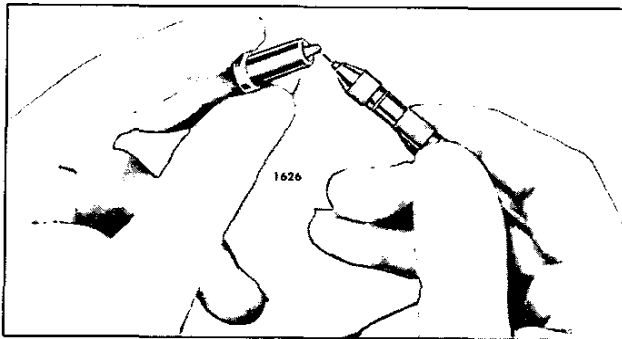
Cleaning Spray Tip Orifices Using Tool J 4298-1
